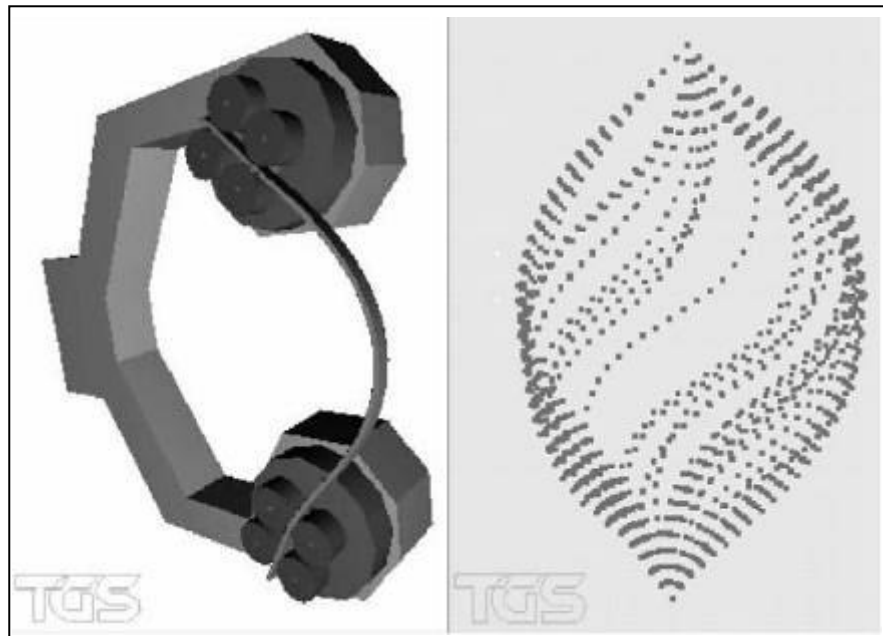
The proposed cutting tool and map of achievable blade shapes
